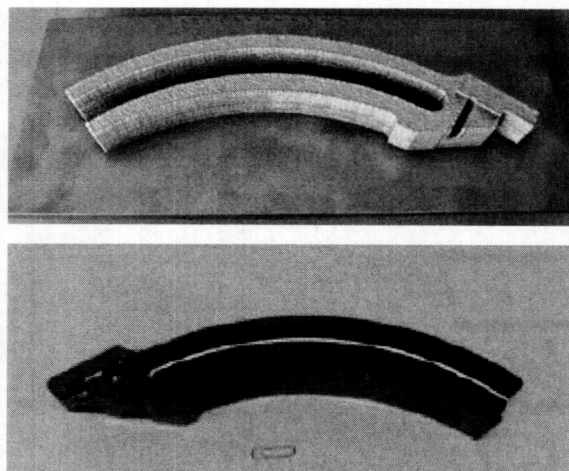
Example of a part processed by direct manufacturing. Top: blank. Bottom: finished part (by courtesy of DASSAULT-AVIATION)
